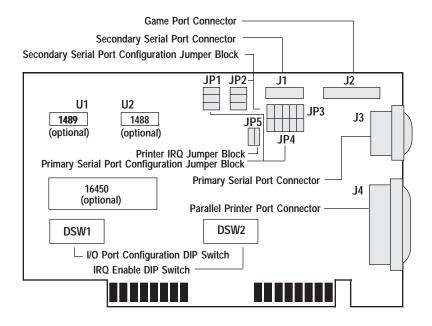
BOARD LAYOUT AND BRIEF DESCRIPTION OF THE DIO-500 I/O BOARD
